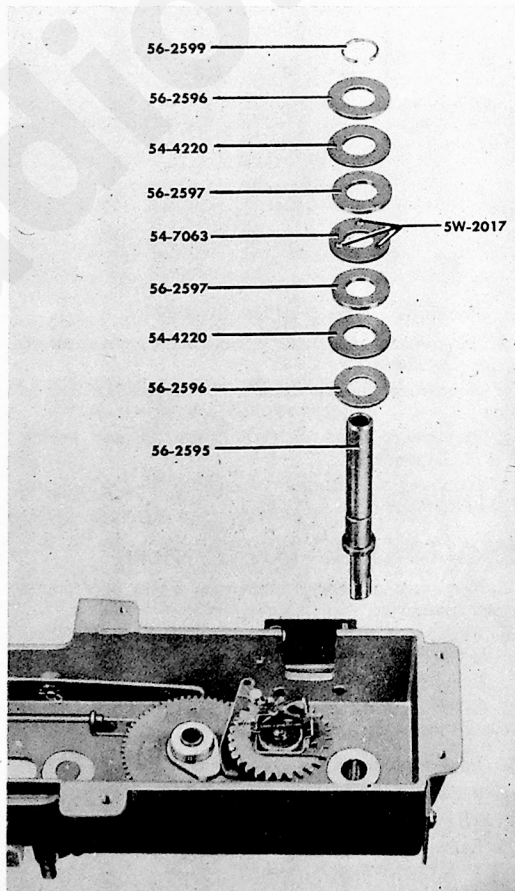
DISASSEMBLY OF TURNTABLE SHAFT AND BEARINGS.
